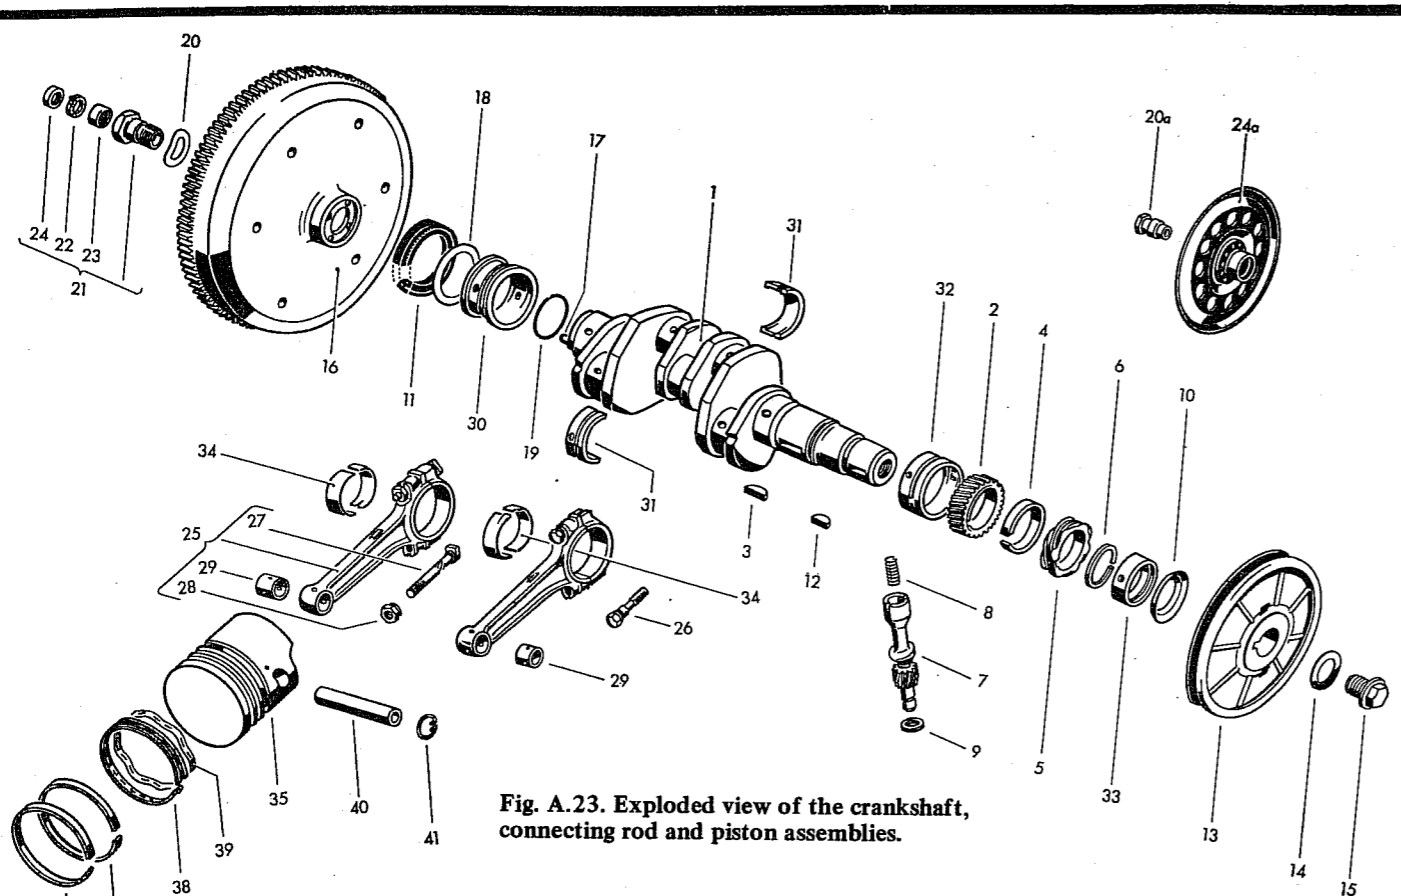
Exploded view of the crankshaft, connecting rod and piston assemblies.
